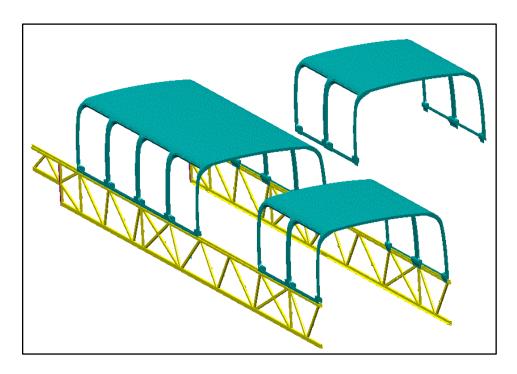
Proposed Lightweight Roof Modular Design of Complete Roof and Window Post Sections of Varying Length
